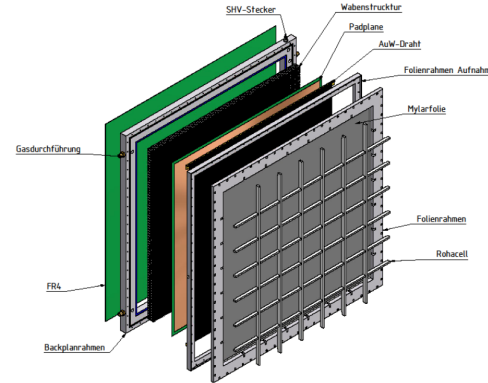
Technical drawing of a full-size TRD-prototype without drift region.
